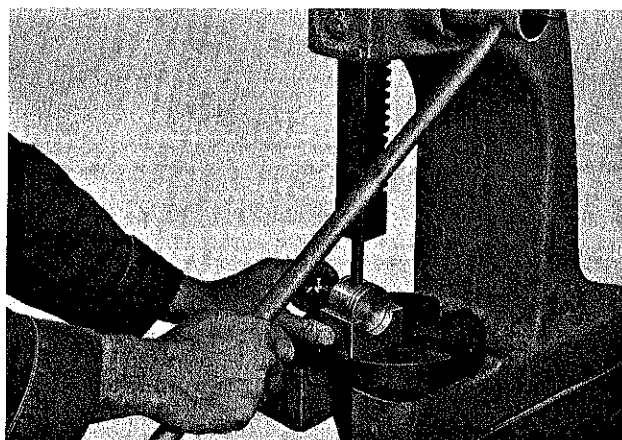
Pressing the piston pin into the piston. The connecting rod eye and the thrust washers must first be properly aligned to permit pin installation. The pin must be pressed only far enough to make the end flush with the outer edge of the bearing.
